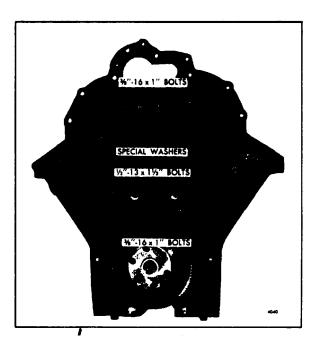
Cylinder Block Rear End Plate Mounting (V-Type Engine)
